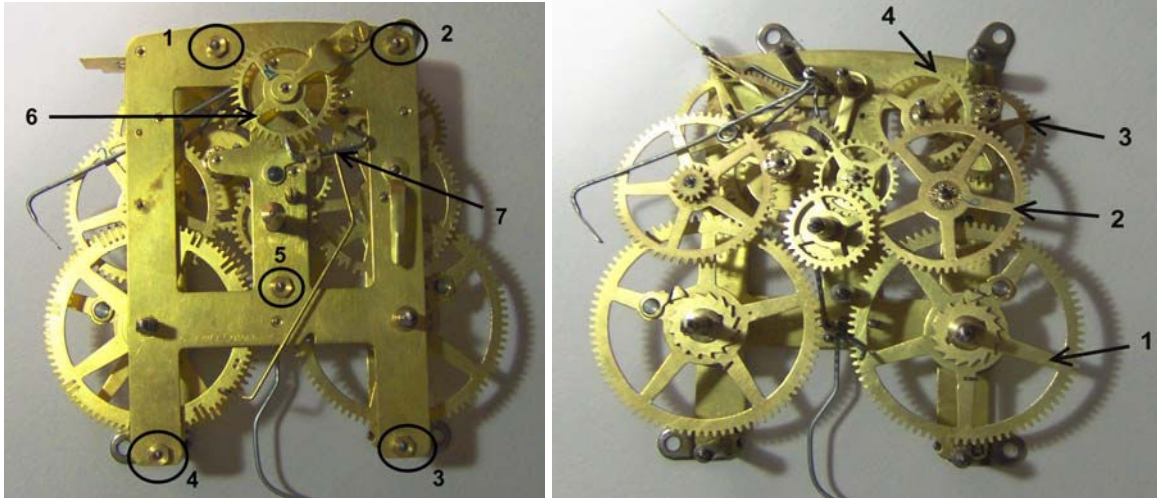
Assembled and internal components of a clock's mechanism – (a) front view of entire assembly, and (b) front plate removed to illustrate the meshed gear trains
